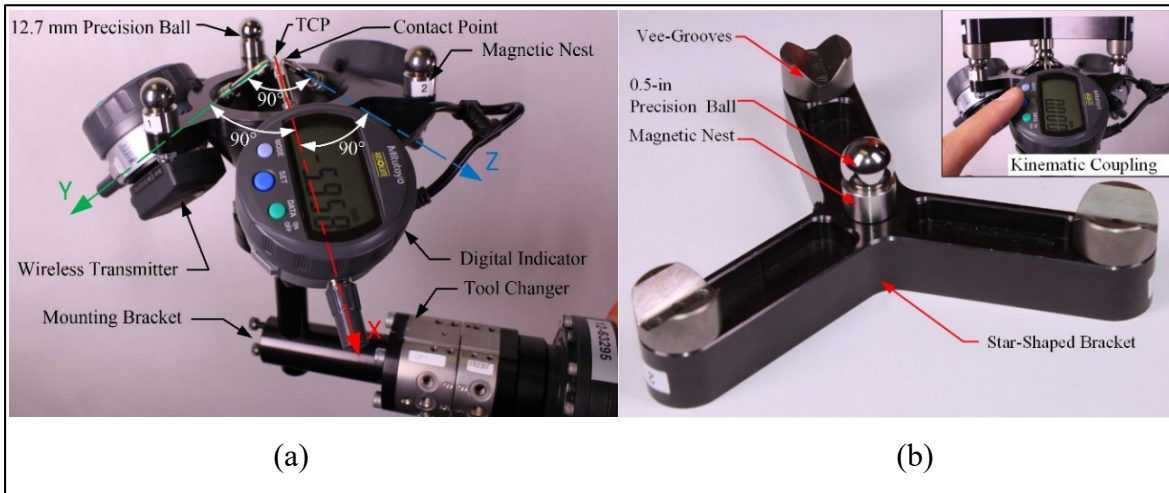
Old prototype of TriCal: (a) the main device and (b) its calibrator fixture
